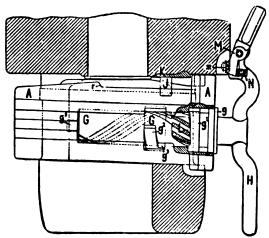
Krupp's guide-shaft breech mechanism "Engineering", for medium and large calibers.
